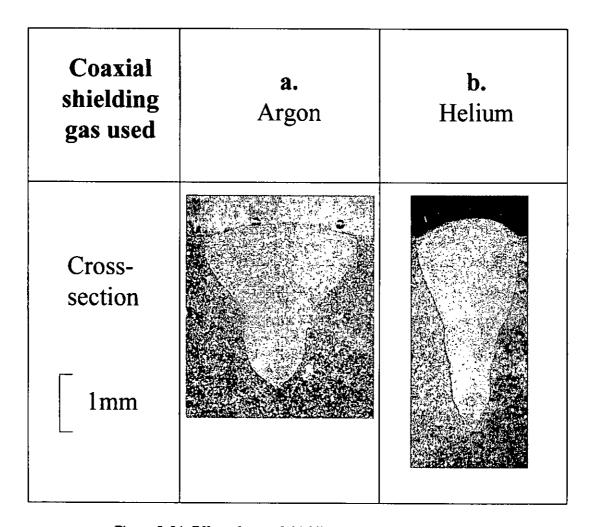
34: Effect of type of shielding gas on weld bead profile
